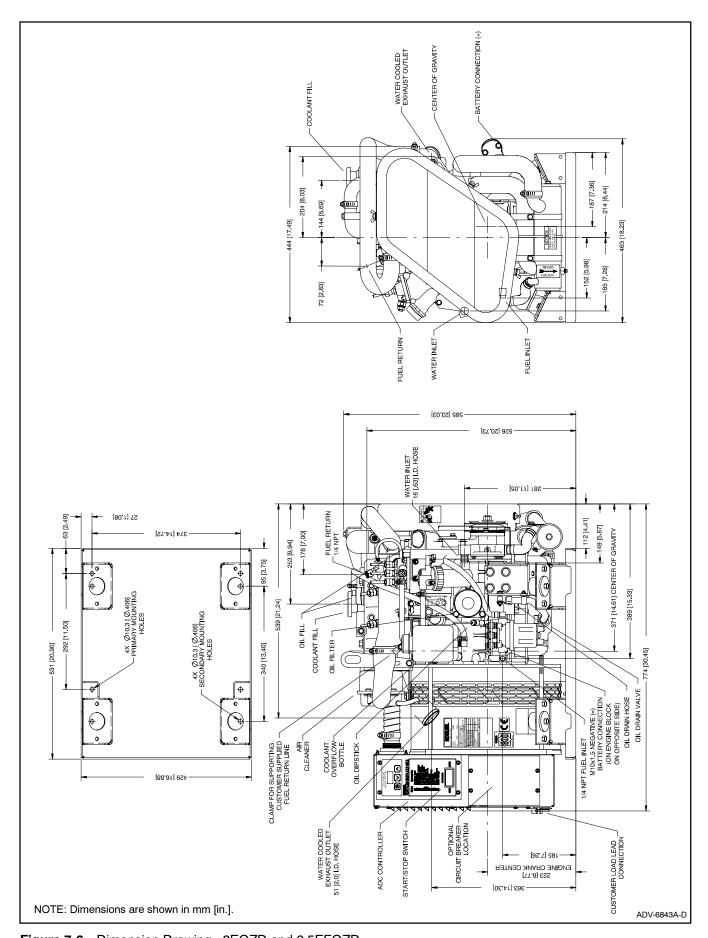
Dimension Drawing, 8EOZD and 6.5EFOZD
